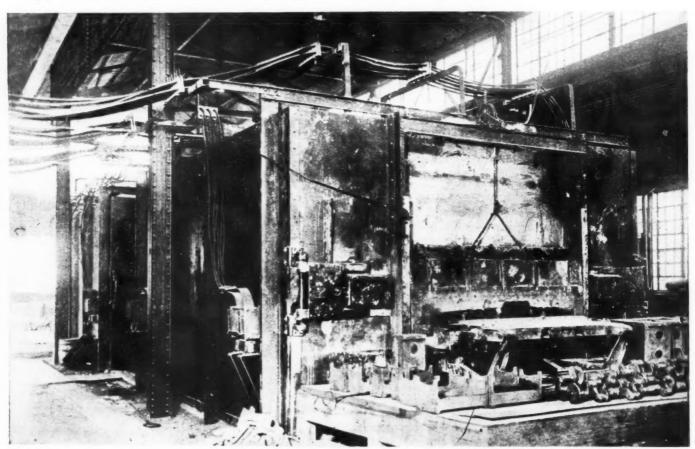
A 900-kw. electric furnace for heat treating crankshaft forgings. Operating at full capacity it will heat 3 tons to 1650° Fahr., and draw at 1000° Fahr. after quenching in one hour
